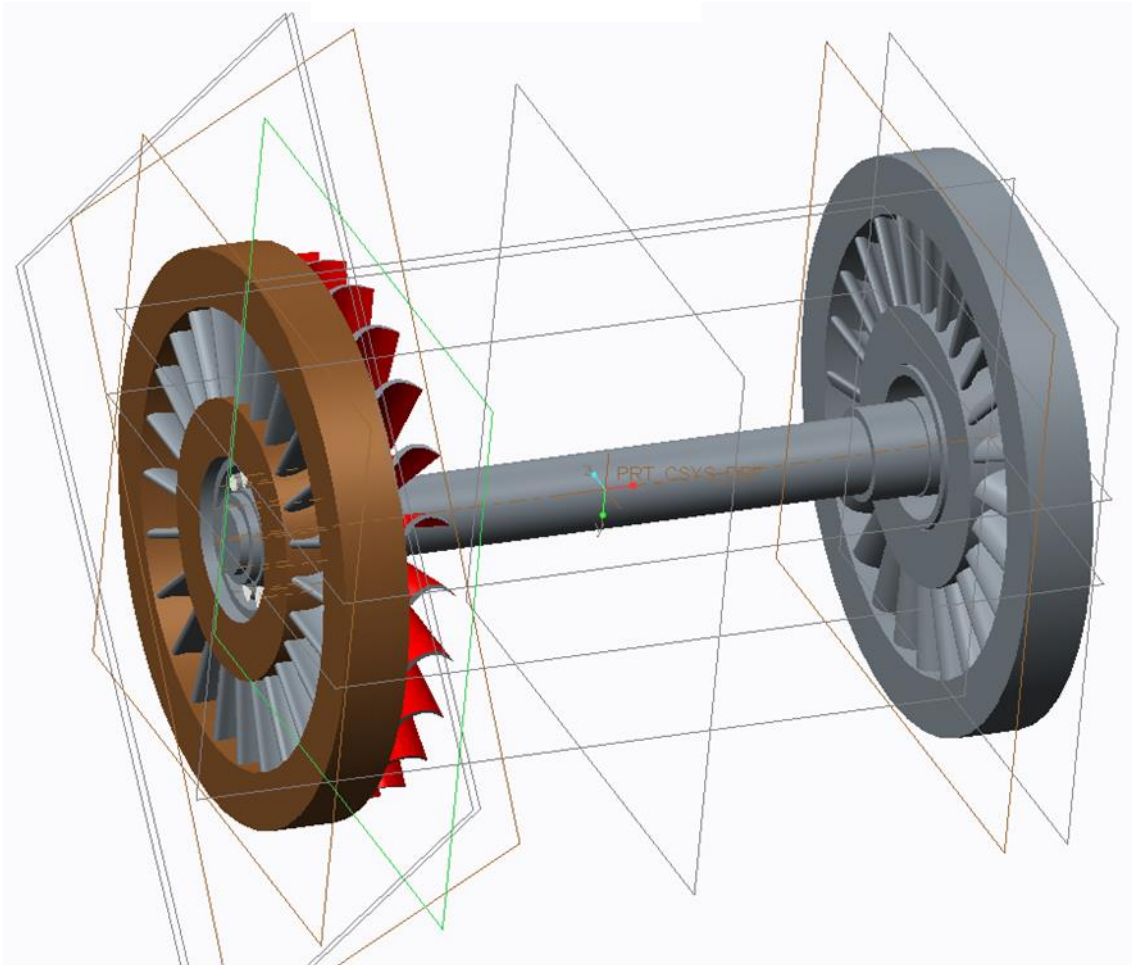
The Rotor Turbine (Red) on the Stator Shaft (grey)
